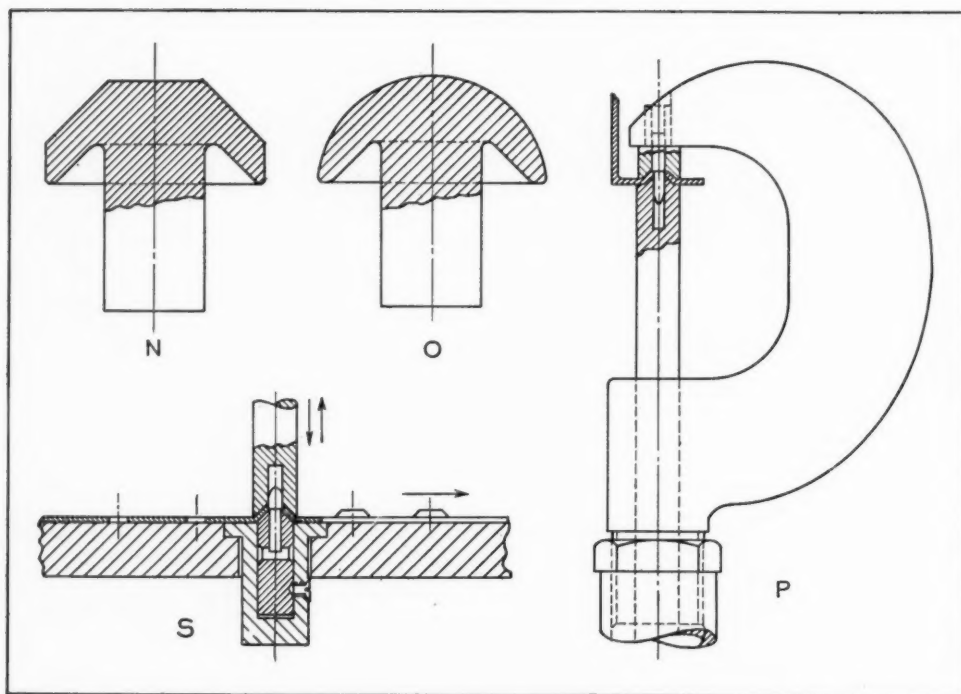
Types of Rivets and Tools Used in Making Riveted Joints for Airplanes
